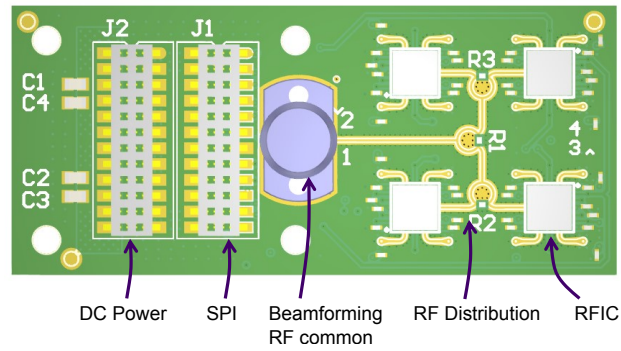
Layout illustration of the secondary PCB of the 16-element beamforming array.
